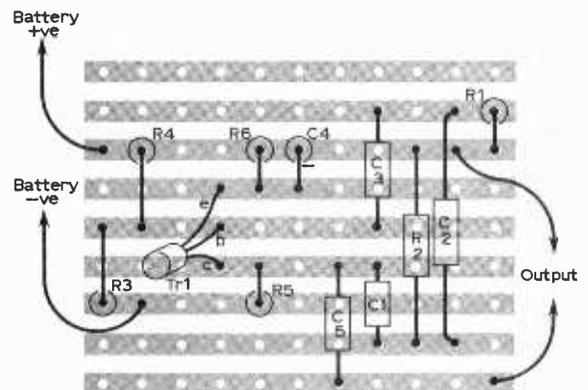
The component layout; there are no breaks in the Veroboard copper strip.
